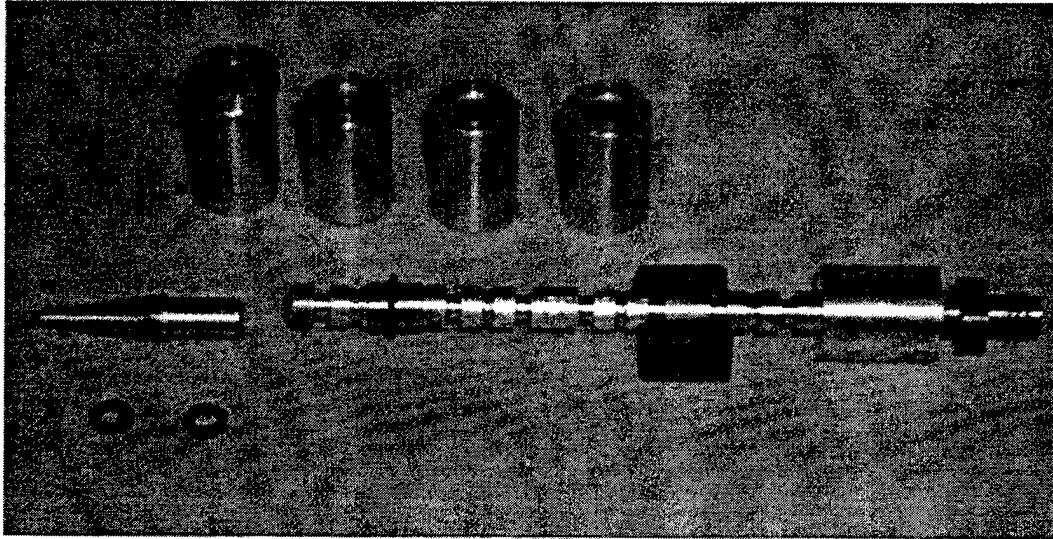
Assembly Tool for Mounting O-Rings in Aging Fixture
